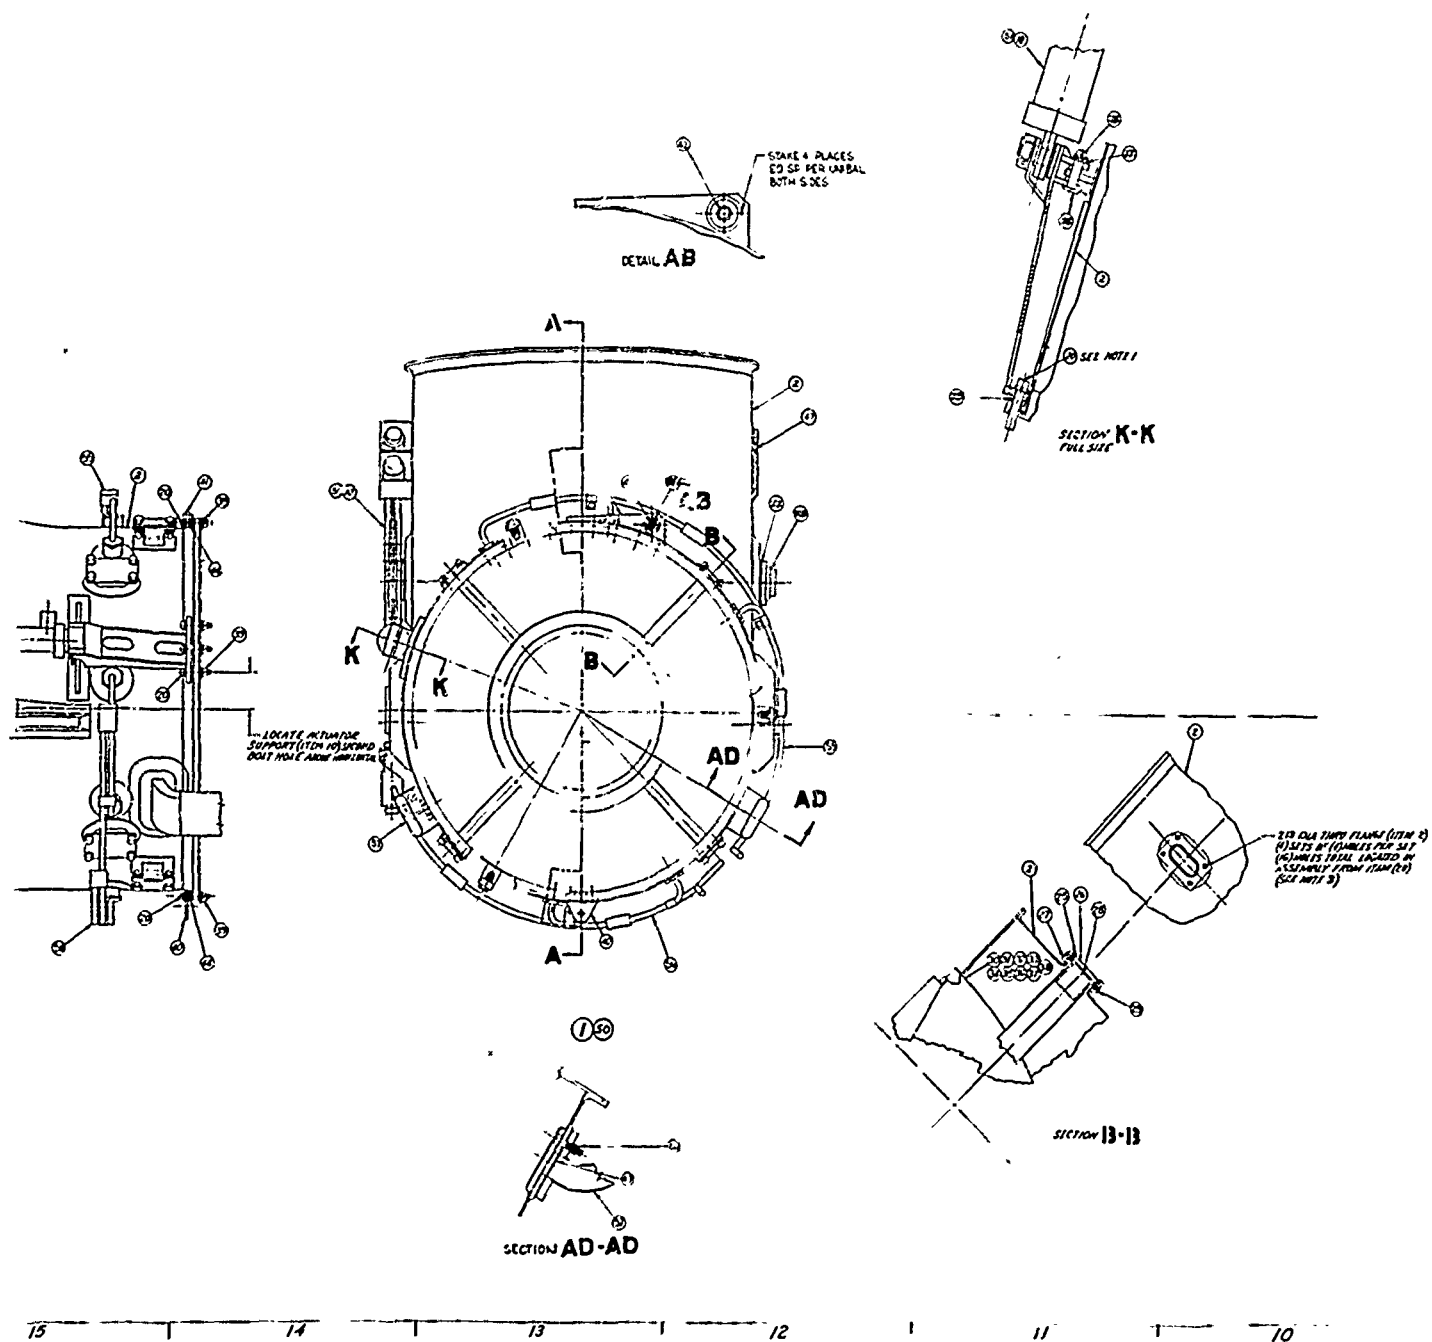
ASSEMBLY DRAWING, LEFT HAND DIVERTER VALVE
